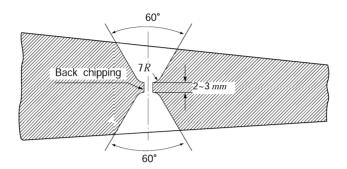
Edge Preparation for Repair Welding of Blade Edge
